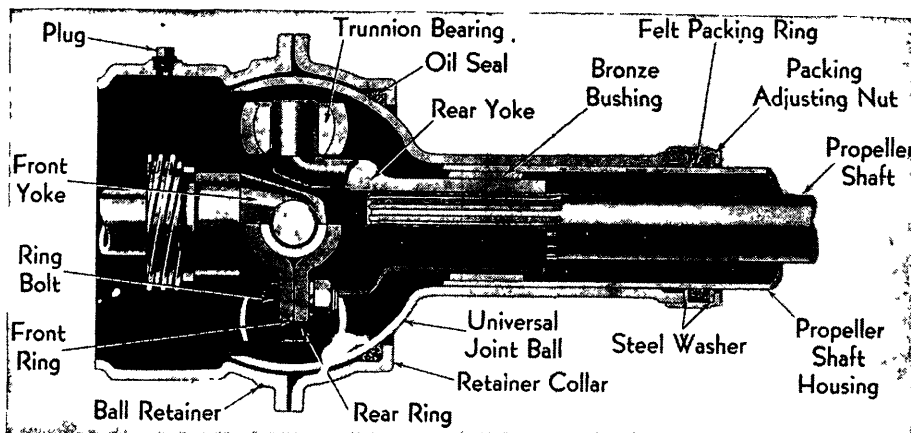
Chevrolet Split Ring Joint with bolted rings
